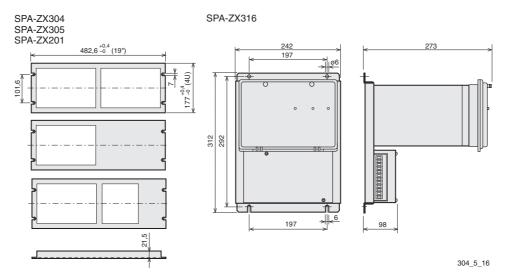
Mounting cabinets and frames as well as projecting mounting (dimensions in mm)
